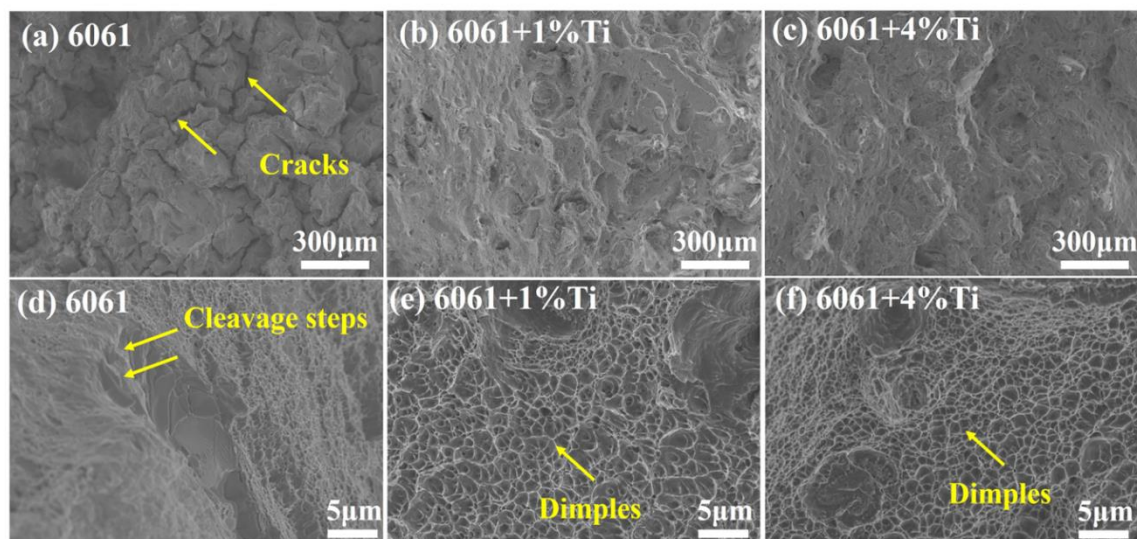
Fracture morphologies of As-built samples after fracture: (a) AA6061, (b) AA6061+1%Ti, (c) AA6061+4%Ti, (d) AA6061, (e) AA6061+1%Ti, (f) AA6061+4%Ti.
